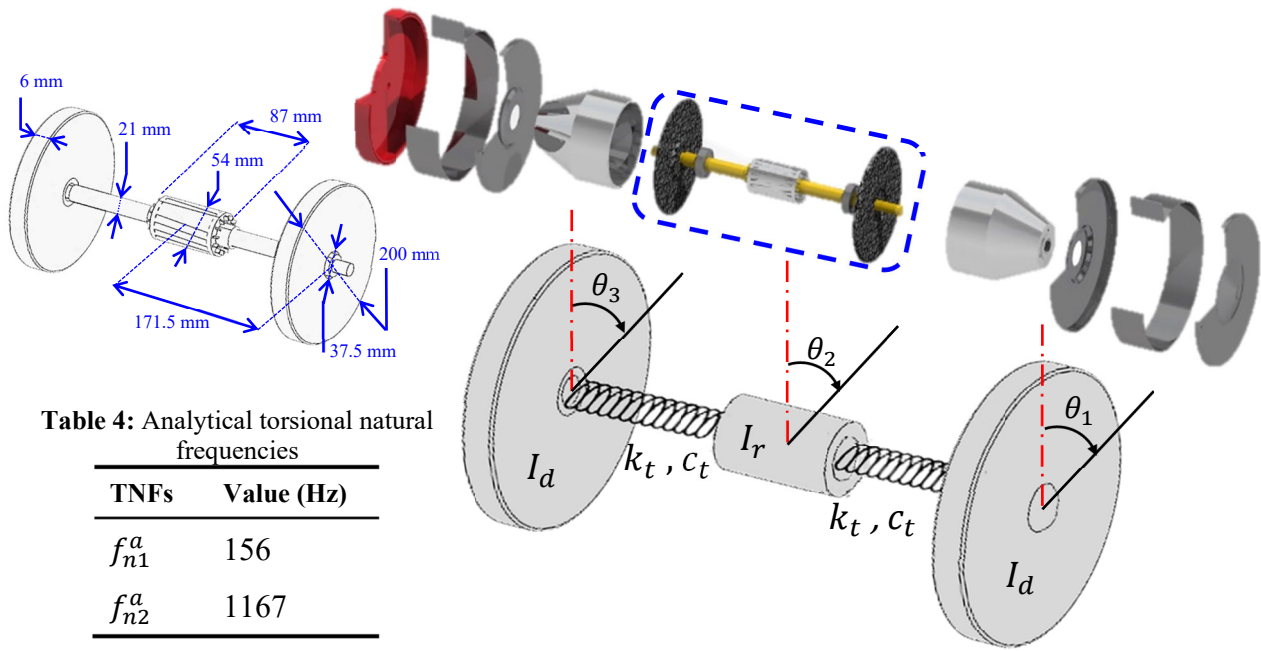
3DOF torsional dynamic model of rotor assembly for bench grinder
